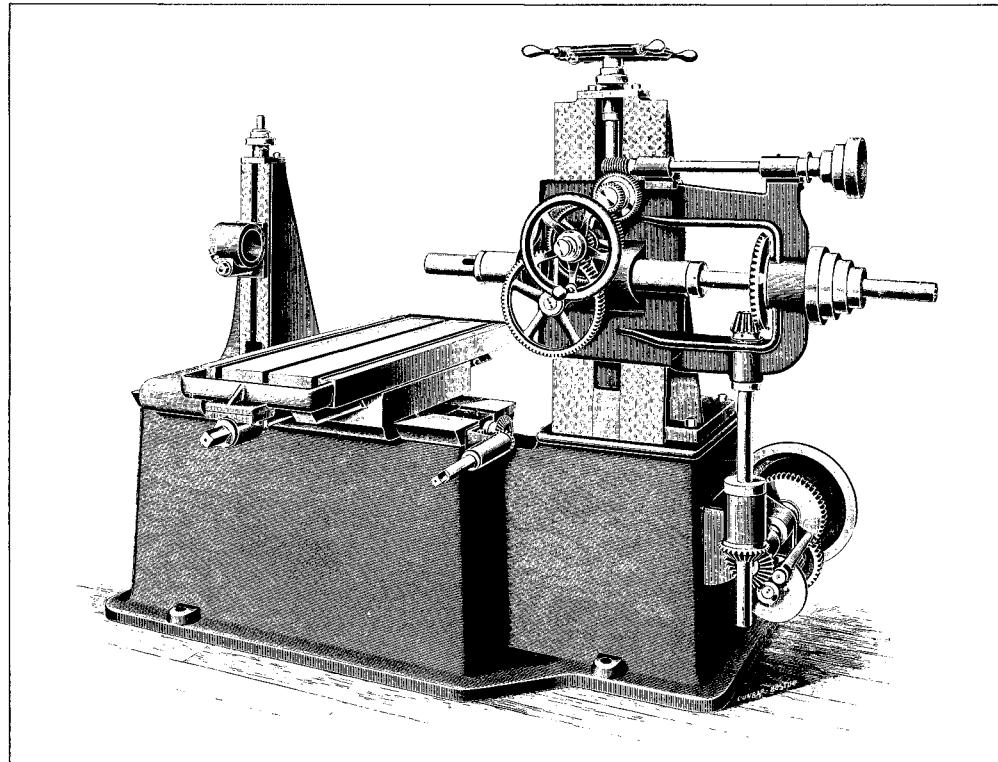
The Universal Boring Mill, first built around 1896, located by coordinates, and established the hole around the machine spindle axis as with a jig borer. However, it lacked the prerequisite accuracy to perform the functions of a jig borer.
